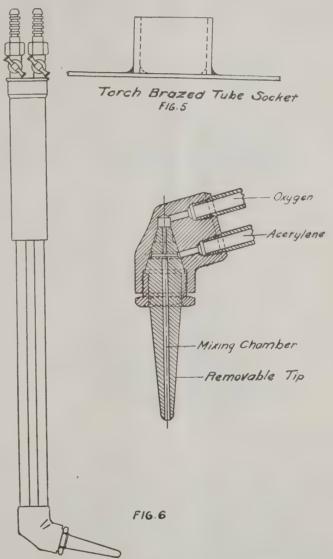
An Example of Torch Brazing. Fig. 6. Brazing or Welding Torch.
